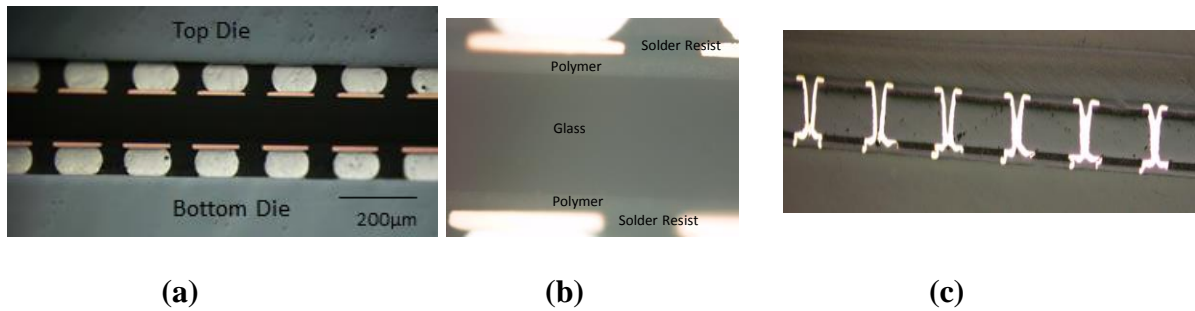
(a) Cross-section of a representative test vehicle with double-side assembly (b) Cross-section of the interposer showing the pad and solder resist, and (c) TPV Array after double-side assembly.
